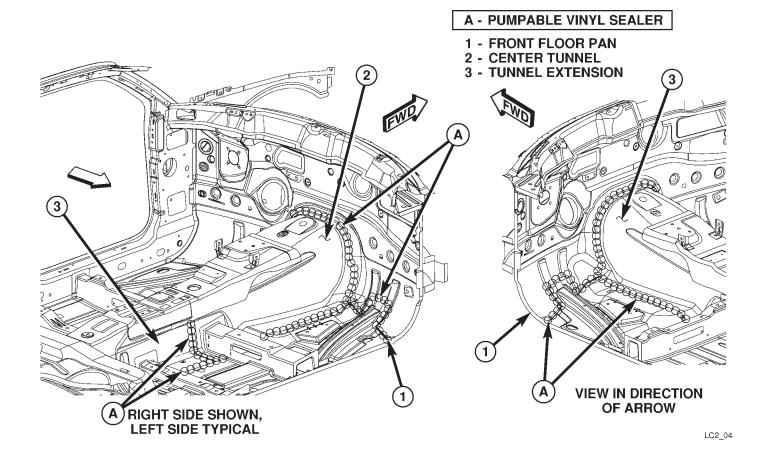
FRONT FLOOR PAN/CENTER FLOOR PAN
